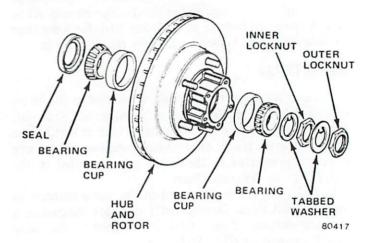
H-8 Rotor and Wheel Bearings-CJ and Scrambler Models
